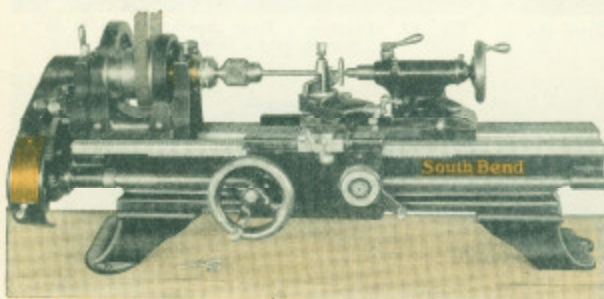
Refacing a Valve in the New Model 9-inch Junior Lathe
